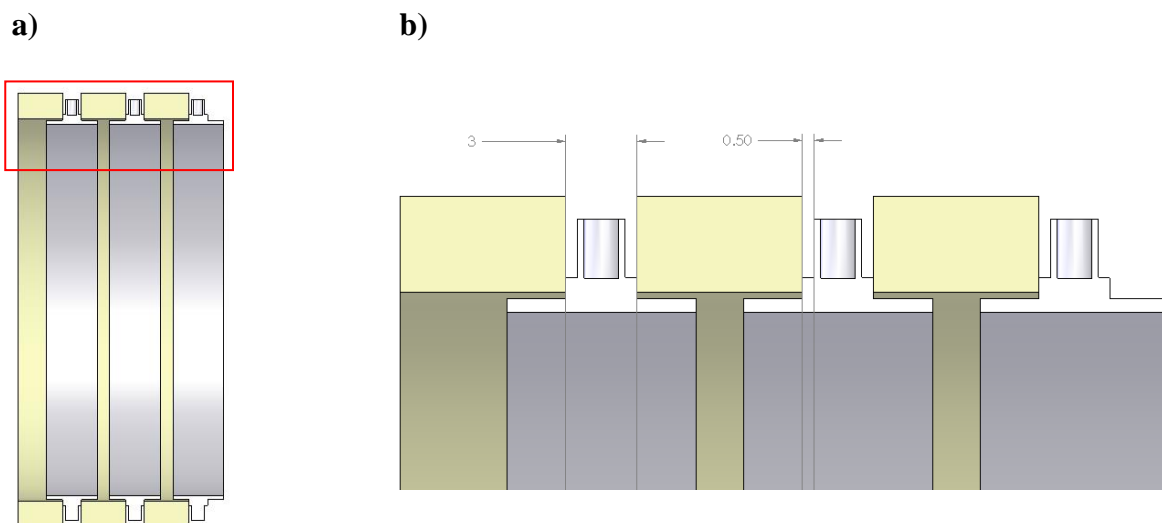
CAD drawings of a) cross-sectioned view of a stacked ring assembly consisting of three Alloy 46 electrodes (gray) and three ceramic insulator rings (tan); and b) detailed view of the spacing of the drift rings highlighted by the red box in Figure 1a.
